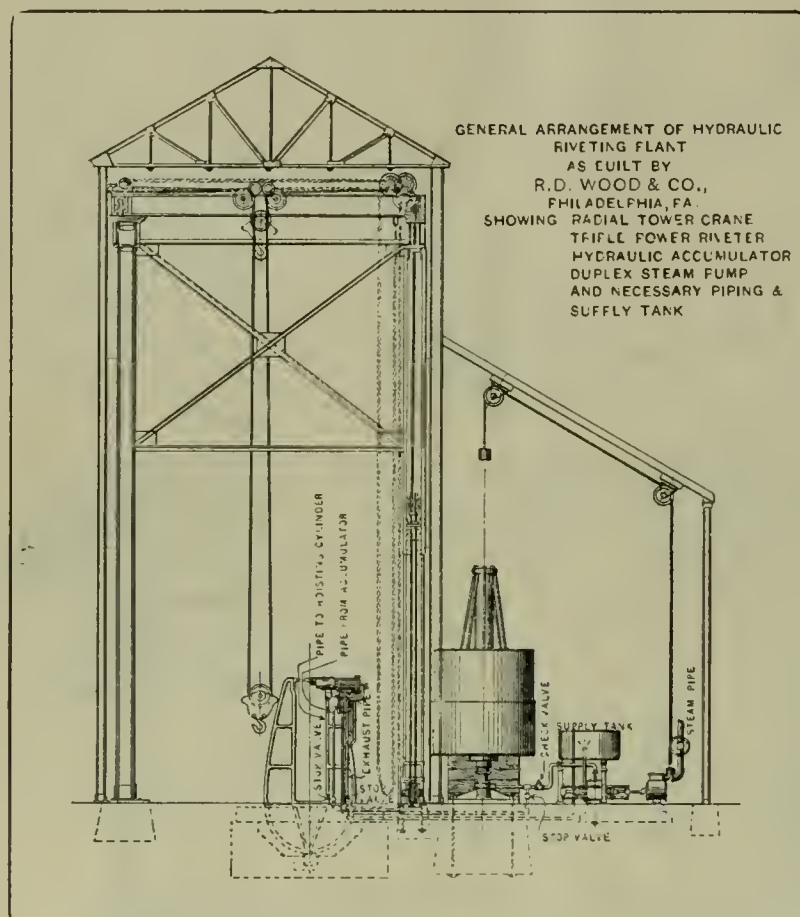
ARRANGEMENT OF HYDRAULIC RIVETING PLANT.
